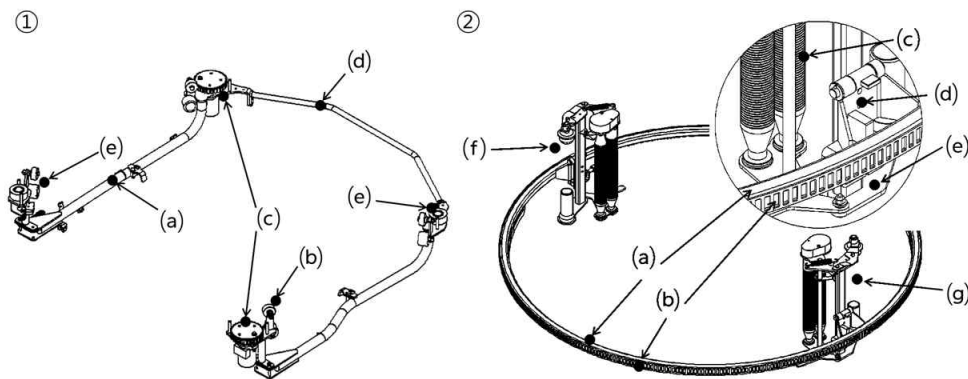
Vinyl wrapping device (①Vinyl wrapper driving part((a)Support structure, (b)Guide roller-A, (c)Driving gear, (d)Adjust structure, (e)Guide roller-B), ②Vinyl wrapper passive part((a)Passive ring, (b)Passive ring gear, (c)Wrap guide, (d)Wrap mounted plate, (e)Wrap holder mounted plate, (f)Wrap holder/left, (g)Wrap holder/right))
